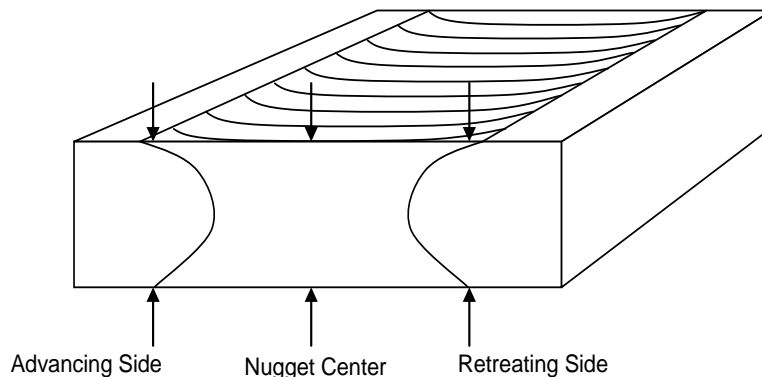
Schematic cross-section of initial weld tensile macrograph.
